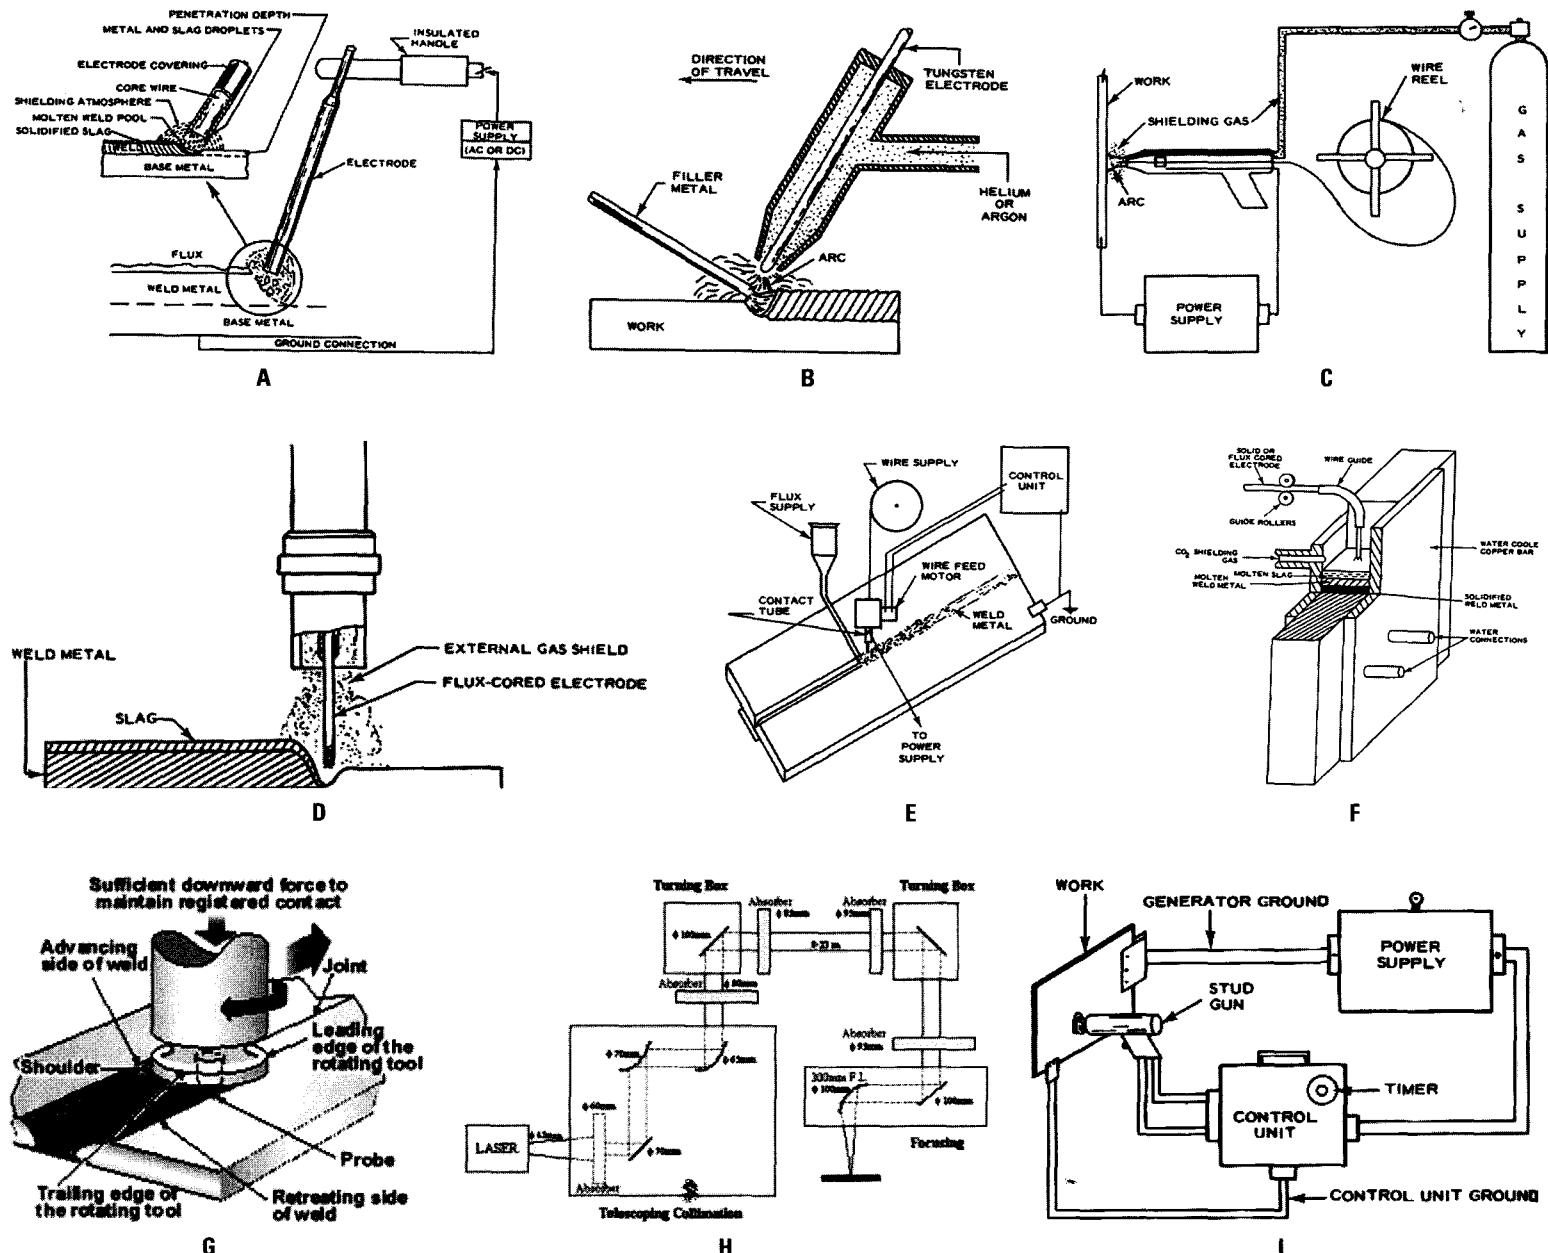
Shipbuilding Welding Processes (1,21) A) Sheiled Metal Arc Welding (SMAW). B) Gas Metal Arc Welding (GMAW). C) Gas Tungsten Arc Welding (GTAW) D) Flux Core Arc Welding (FCAW). E) Submerged Arc Welding (SAW). F) Electrogas Welding. G) Friction Stir Welding. H) Laser Welding I) Stud Welding
